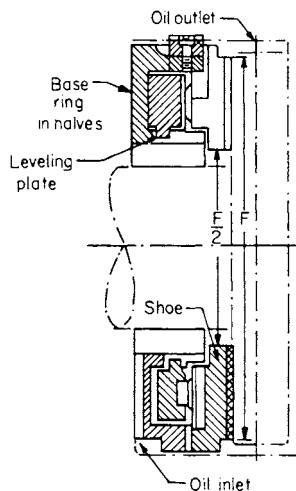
Left half of six-shoe self-aligning equalizing horizontal thrust bearing for load in either axial direction.
